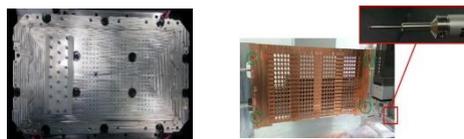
(a) Machining fixture (b) Dimensional measurement of a segment, mounted vertically on CMM
